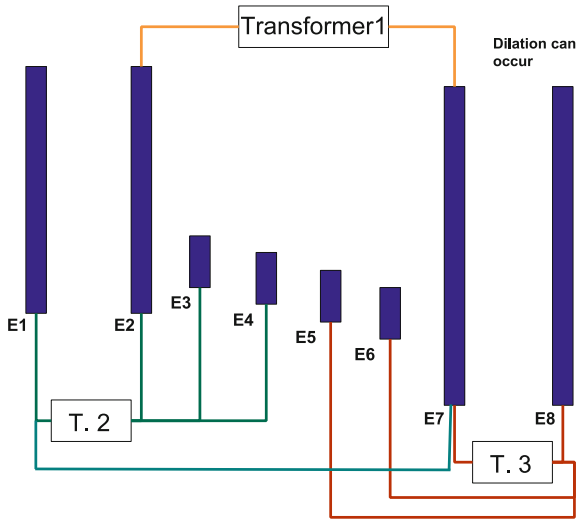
Transformer circuits and electrode/welding tongue assembly [96]
